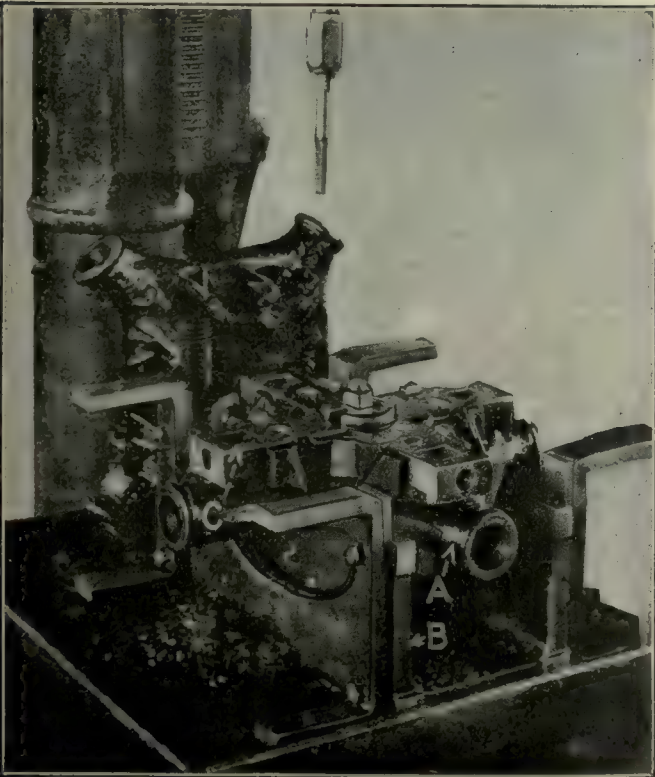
DRILLING ALL SIDES OF STOCK AT ONE JIG SETTING
